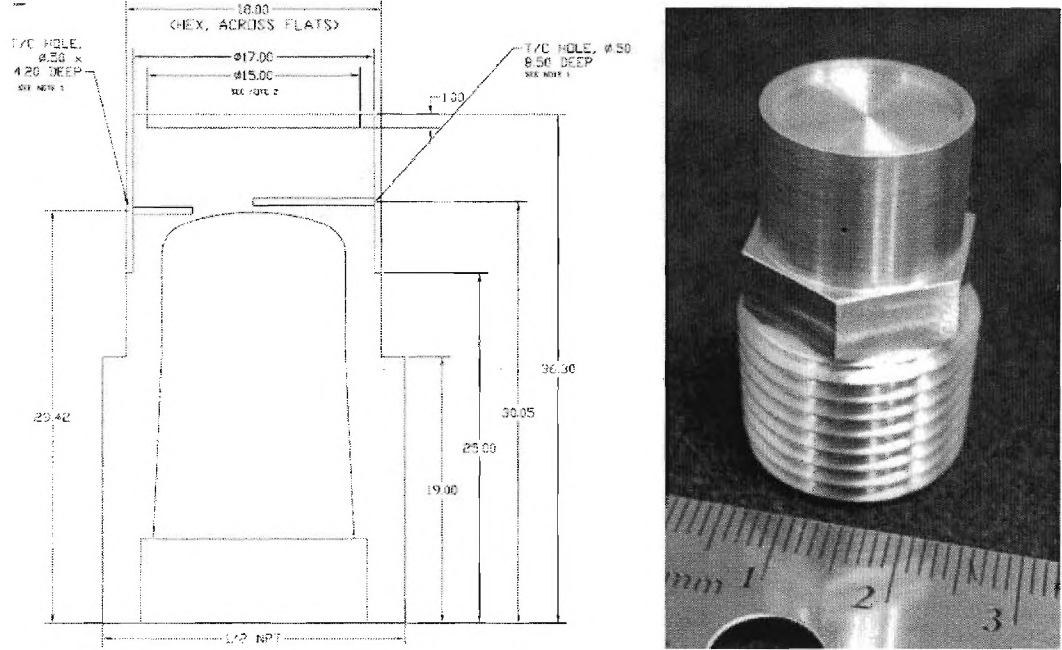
Drawing of the thimble and a photograph of the manufactured thimble.
